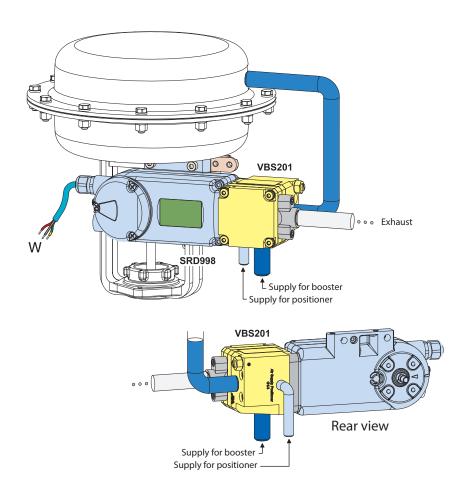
EXAMPLE FOR MOUNTING VBS201 at SRD960, Directly Side Mounted
